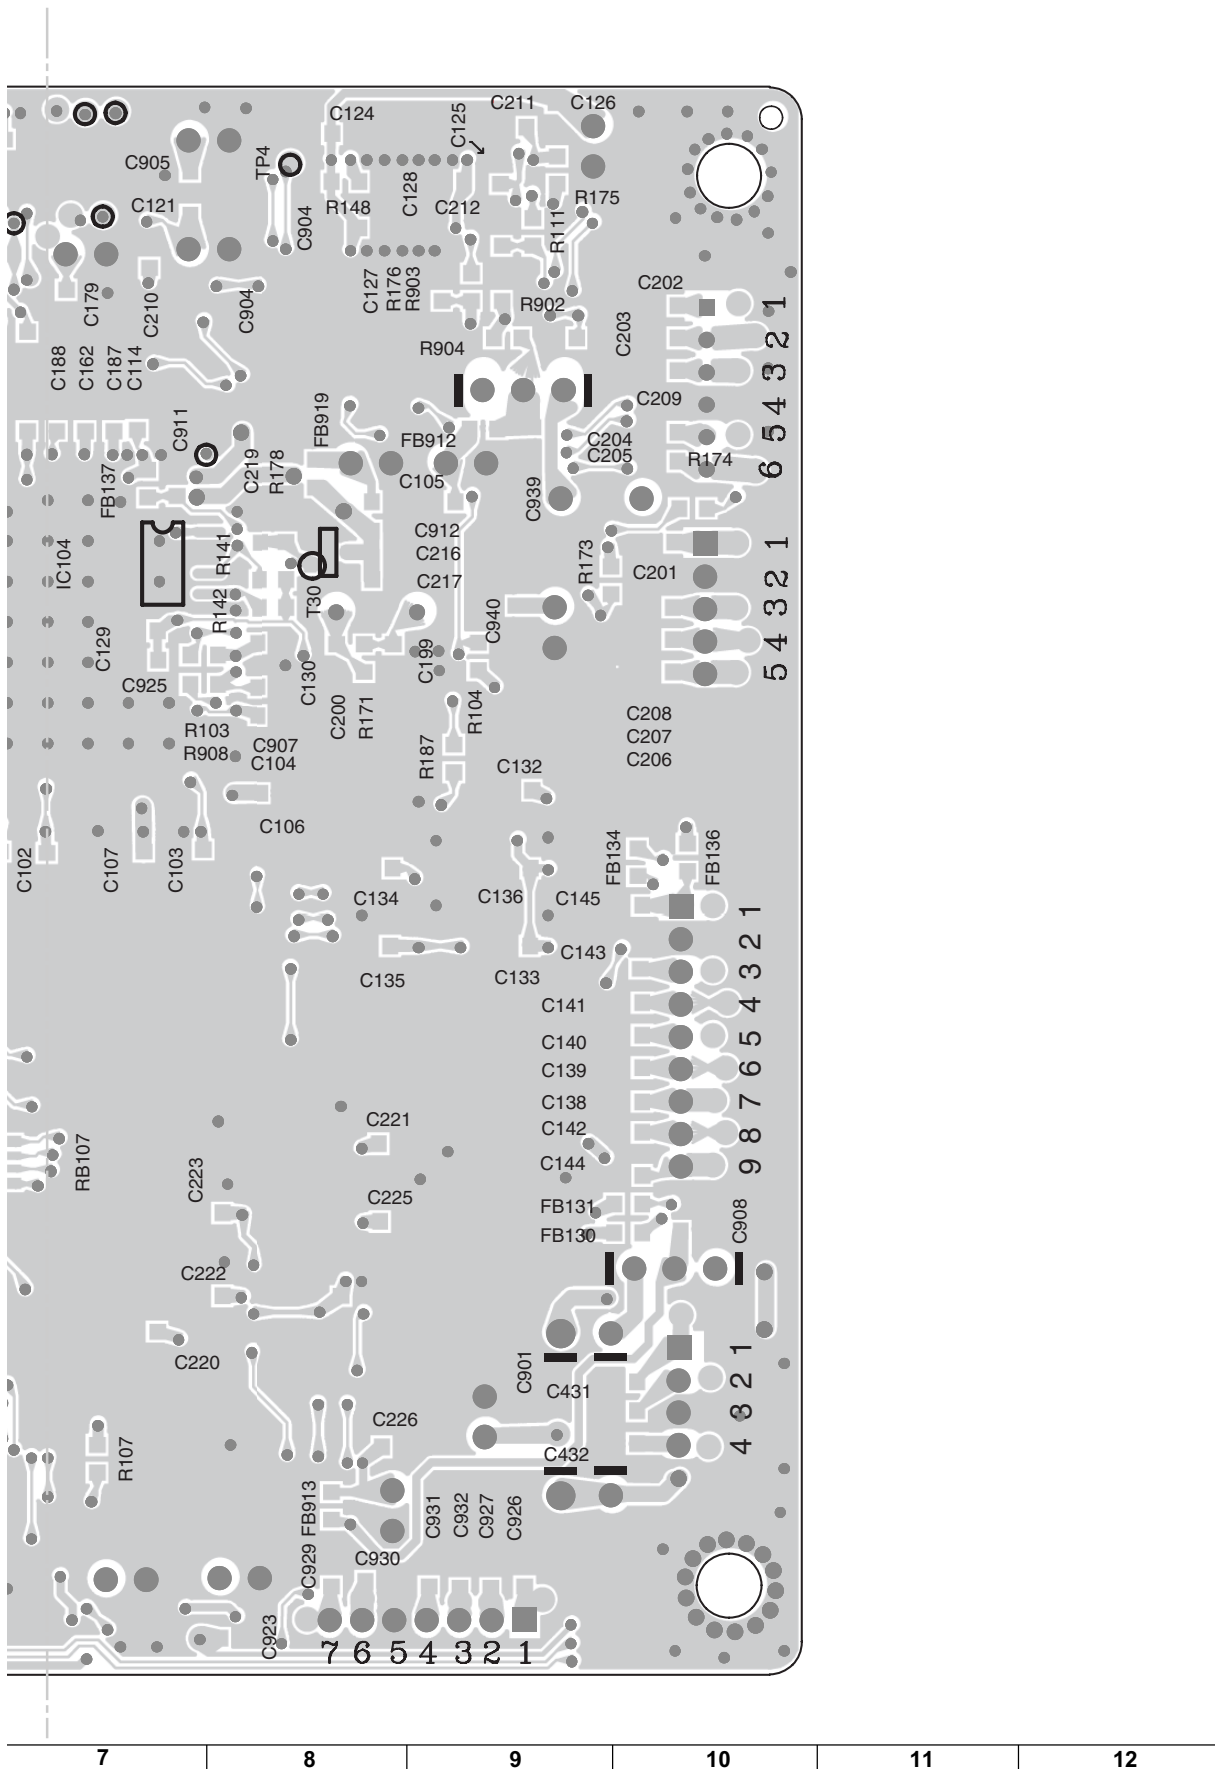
WIRING SIDE OF MAIN PCB (BOTTOM VIEW) 2/2
